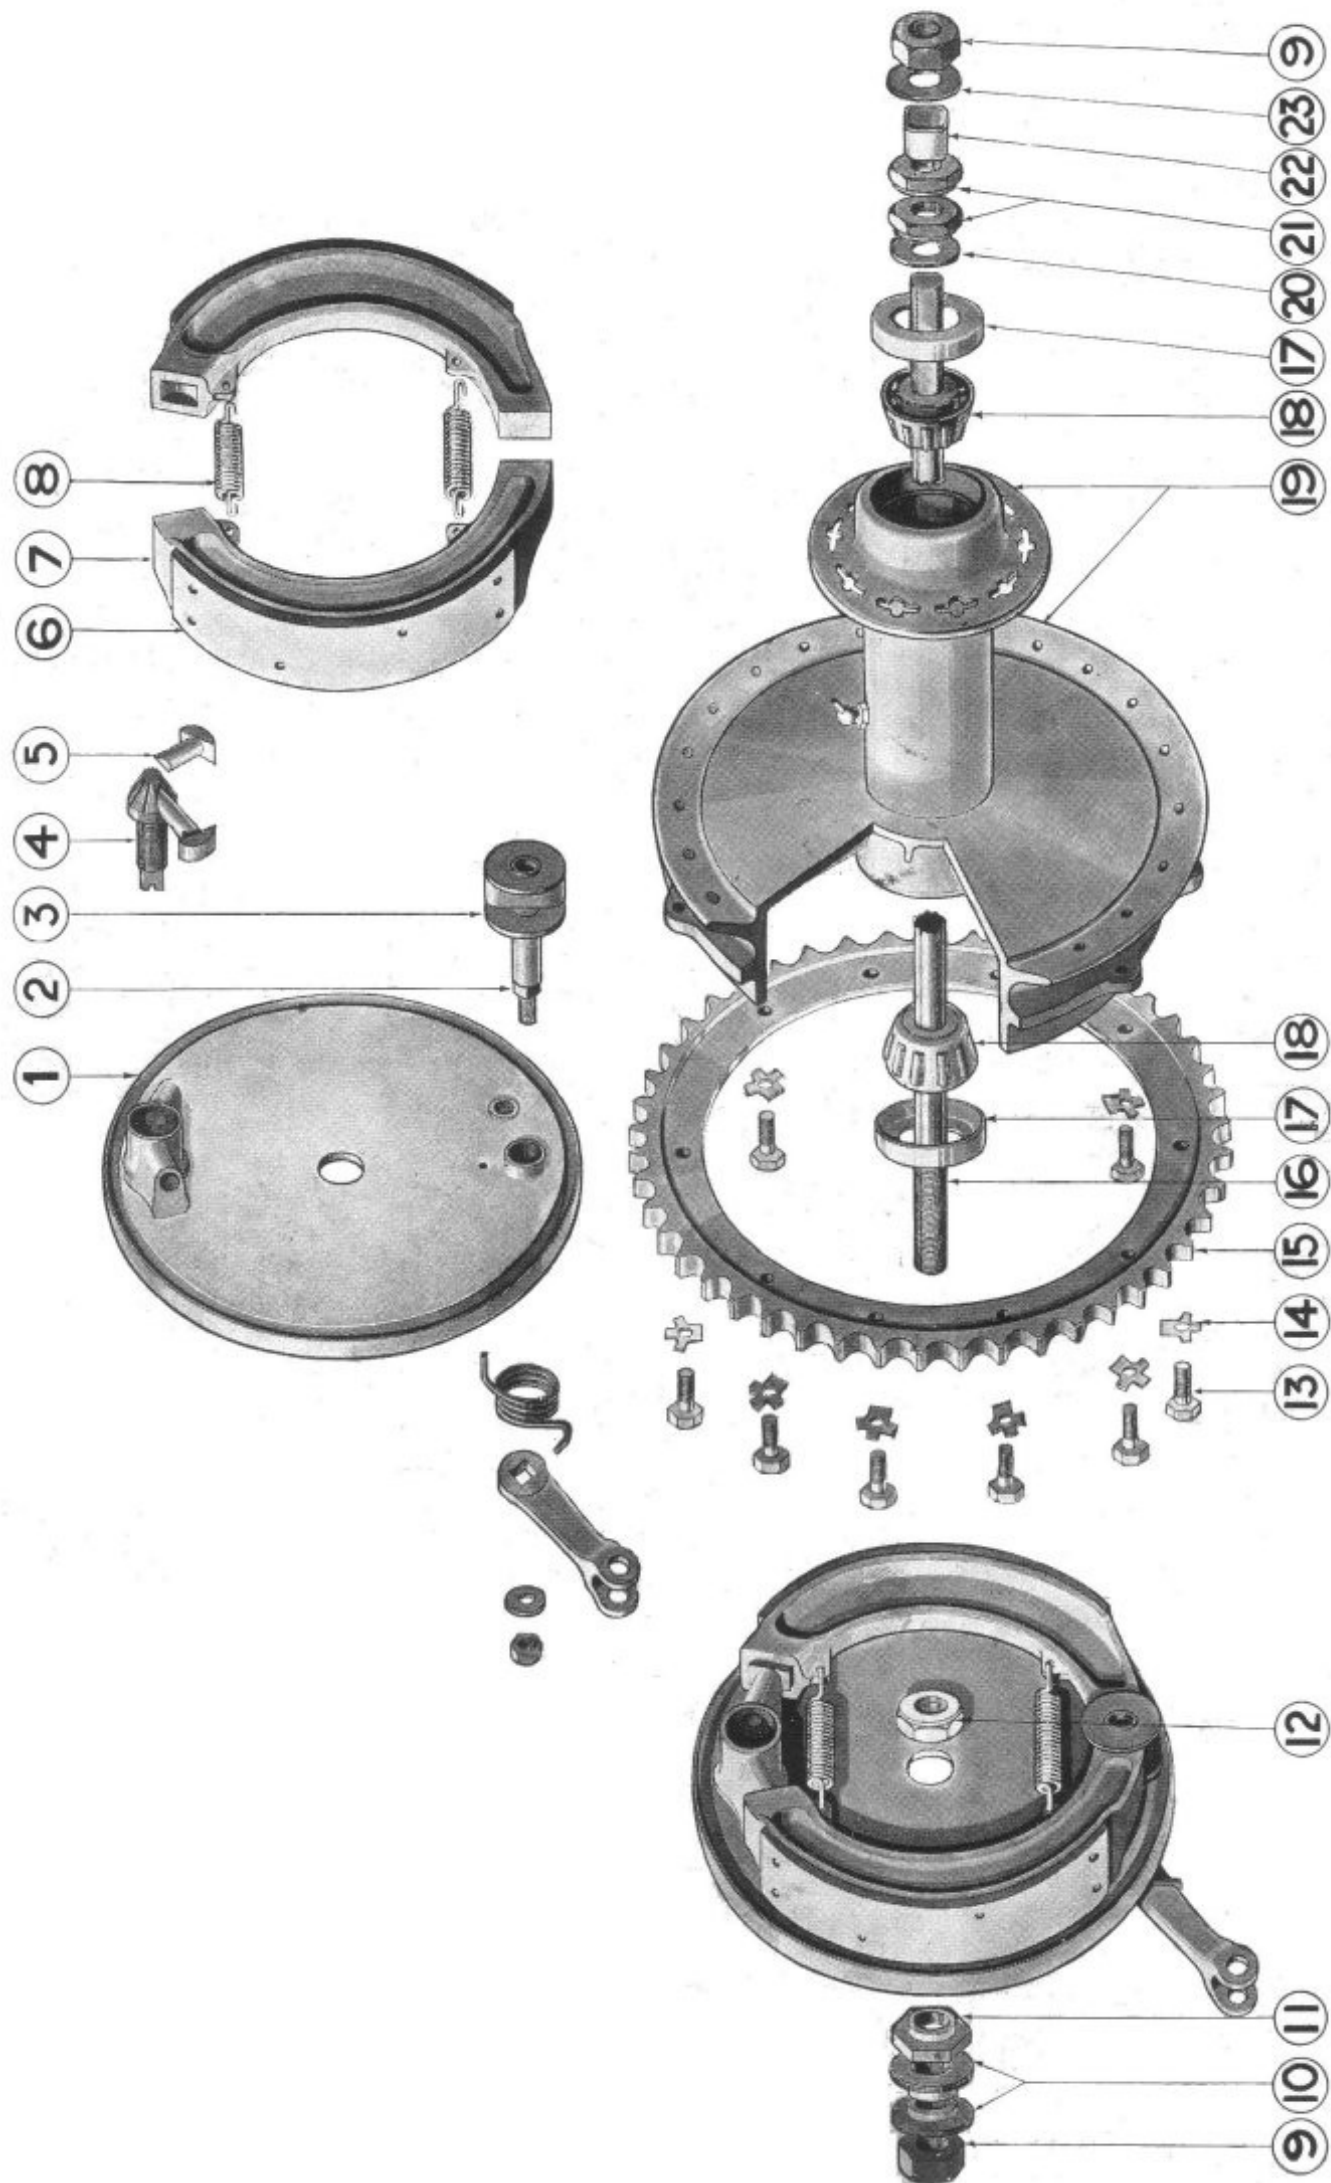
Exploded View of Rear Hub and Brake Assembly.
